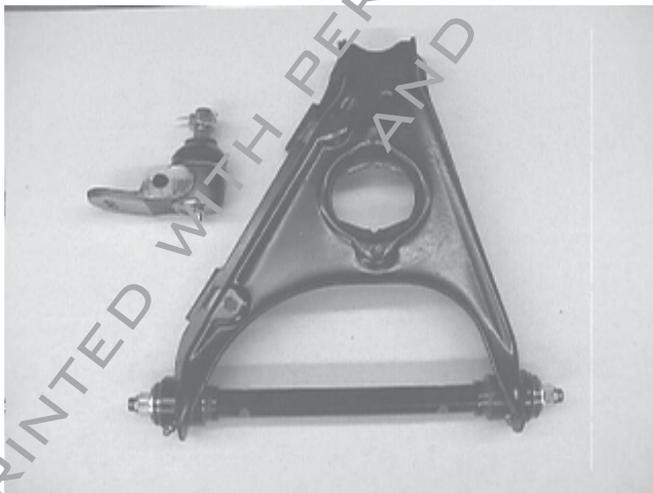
Here's the completed Lower A-Arm and the new lower ball joint. These new ball joints are metal to metal with no nylon inserts that could fail and allow the joint to come apart. This was the design used by the factory OEM supplier back in the 60's.
